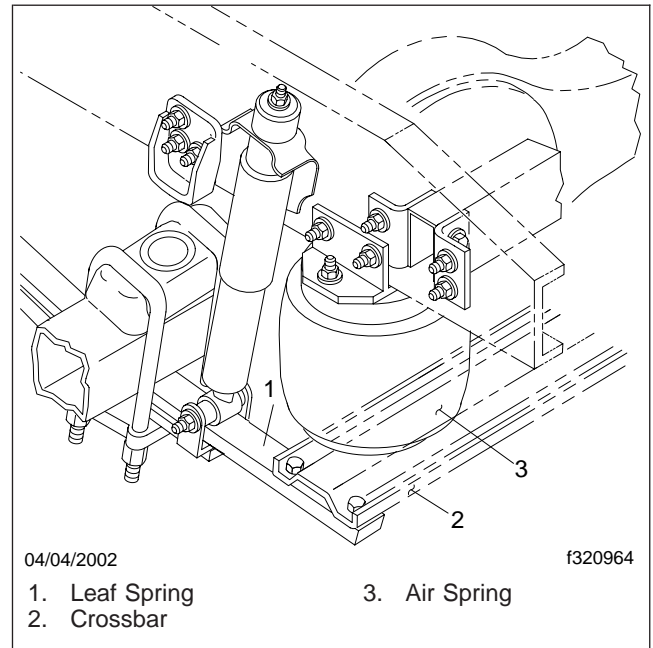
, Leaf Spring and Air Spring Assembly (23,000- and 46,000-pound suspensions)
